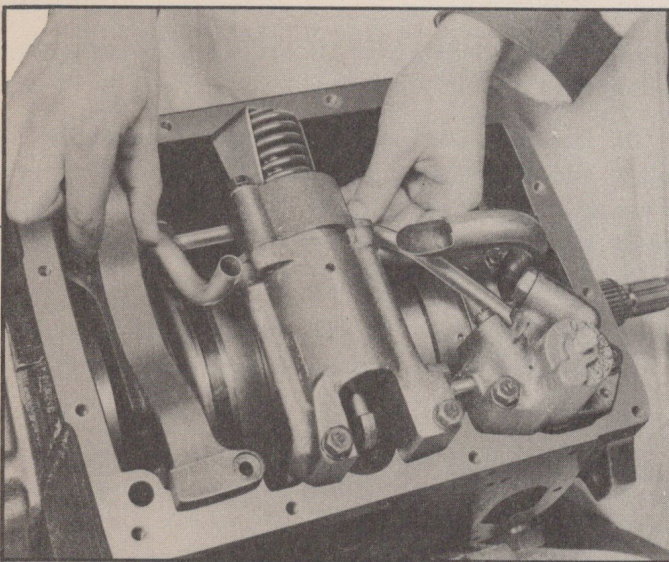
Installing Rear Pump Discharge Pipe Into Rear Pump
